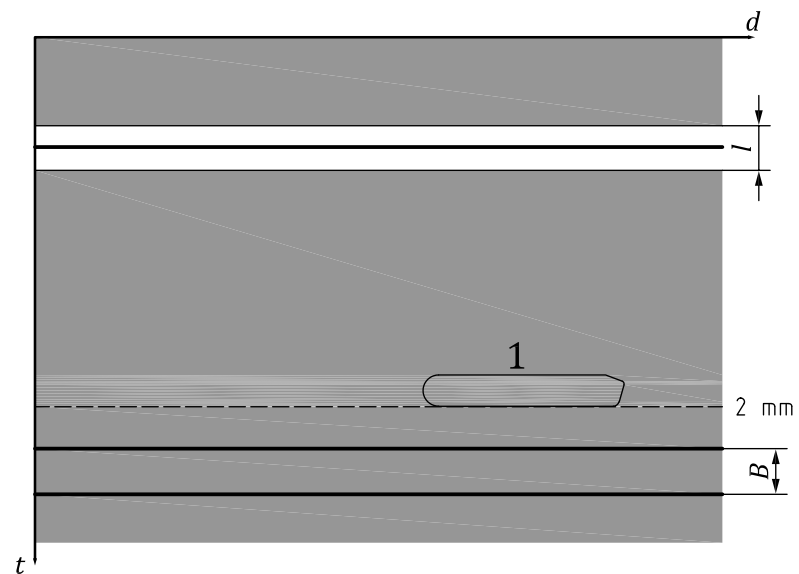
(#) and [Figure I.2](#) provide schematic examples of a surface breaking and an embedded weld flaw respectively.
